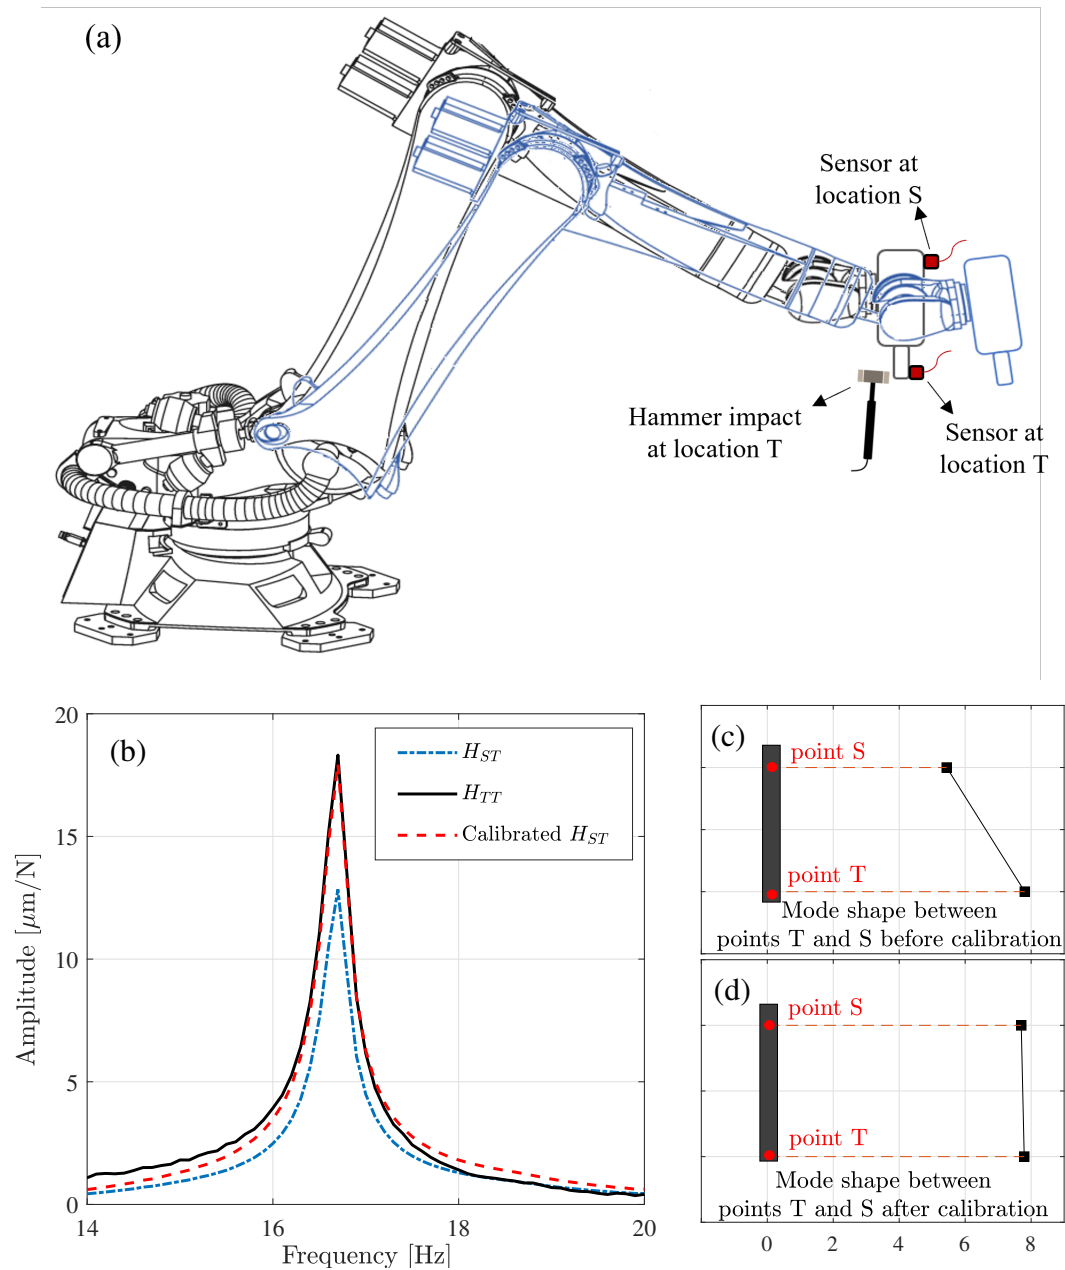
Calibration of identified in-process FRF. (a) illustration of the rigid body motion of the spindle-holder-tool assembly due to rotational displacements at the joints, (b) measured and calibrated FRFs, (c) mode-shape before calibration and (d) after calibration.
